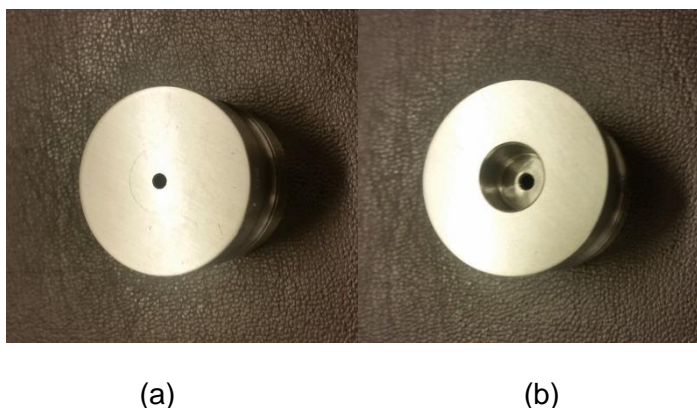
(a) Top and (b) bottom opening of 2 mm diameter die.
